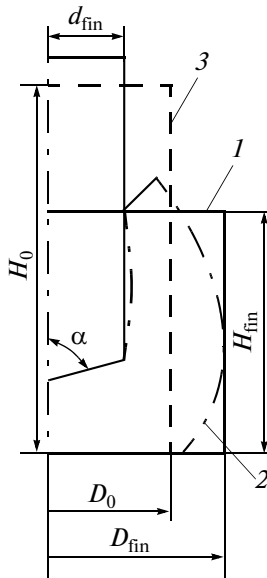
Design of a complex workpiece on the basis of the part to be produced.
